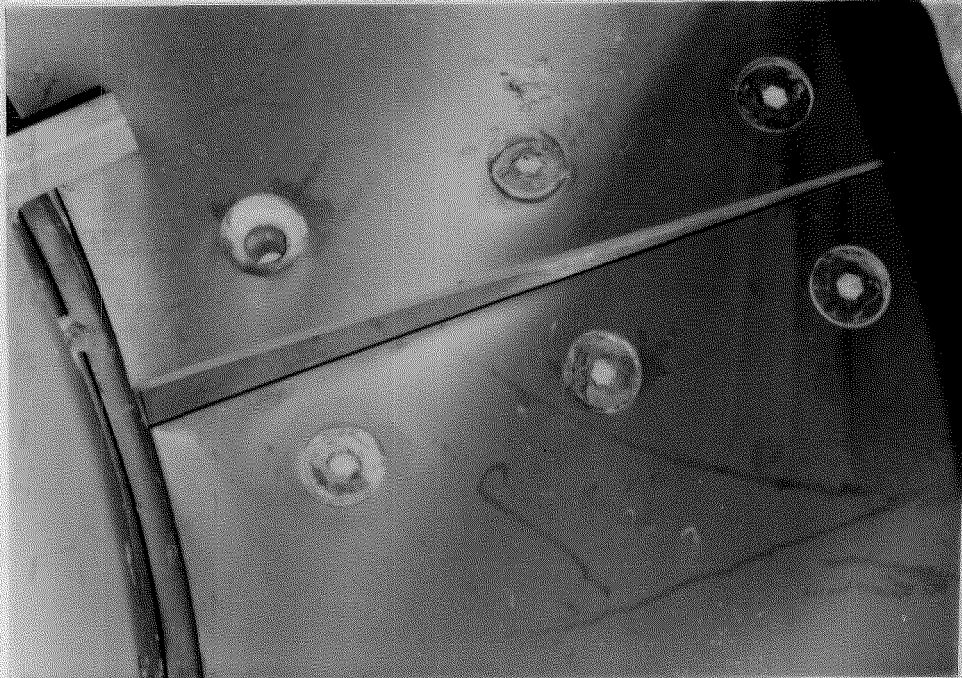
HD outer register assembly backplate showing overheating and thermal expansion at bolted joints. Typical of top row burners where HD's are installed.
